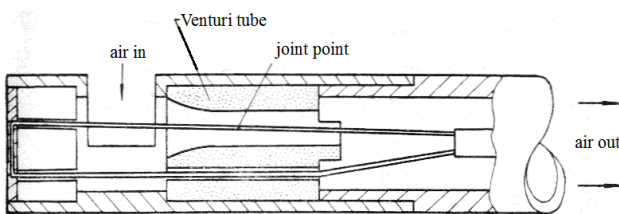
The typical structure of the axial wiredrawing thermocouple
